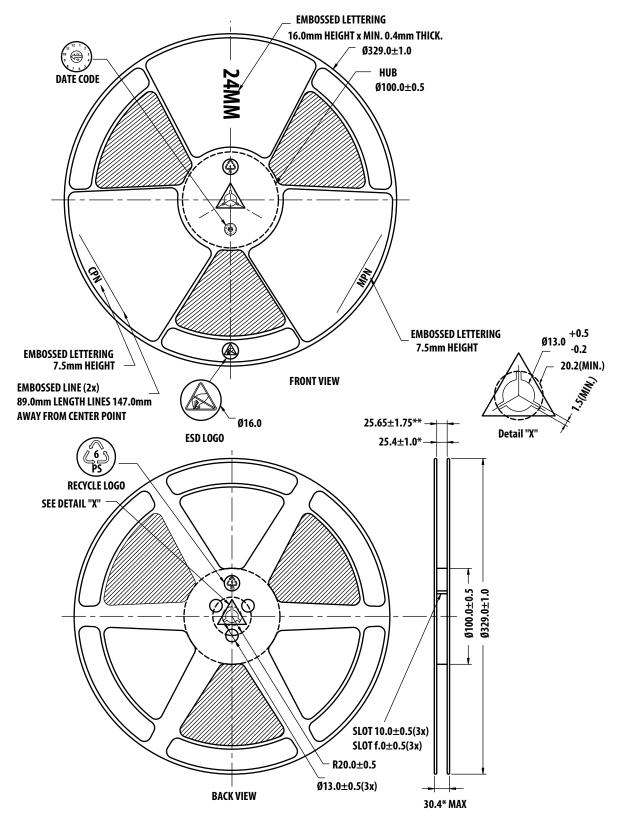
ADNS-7630-TR Tape and Reel Packaging Dimension
